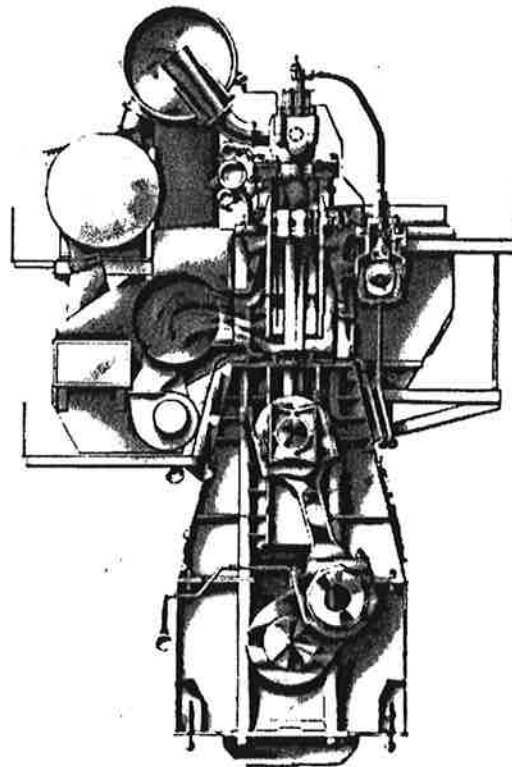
Two stroke engine (right) equipped with sliding bearings for the crank and cam shaft, piston bolt and connecting rod (courtesy, Zollern-BHW).
